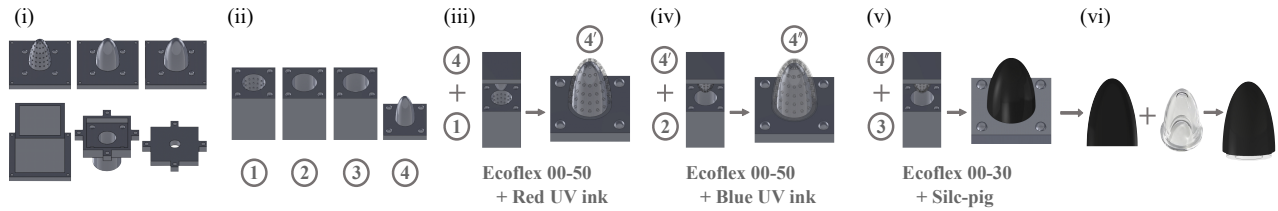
The elastomer fabrication process of UVDtact. (i) Preparation of 3D-printed negative molds. (ii) Fabrication of silicone molds. (iii) Fabrication of inner mixed elastomer. (iv) Fabrication of outer mixed elastomer. (v) Fabrication of black gel. (vi) Merging the elastomer with the acrylic shell.
